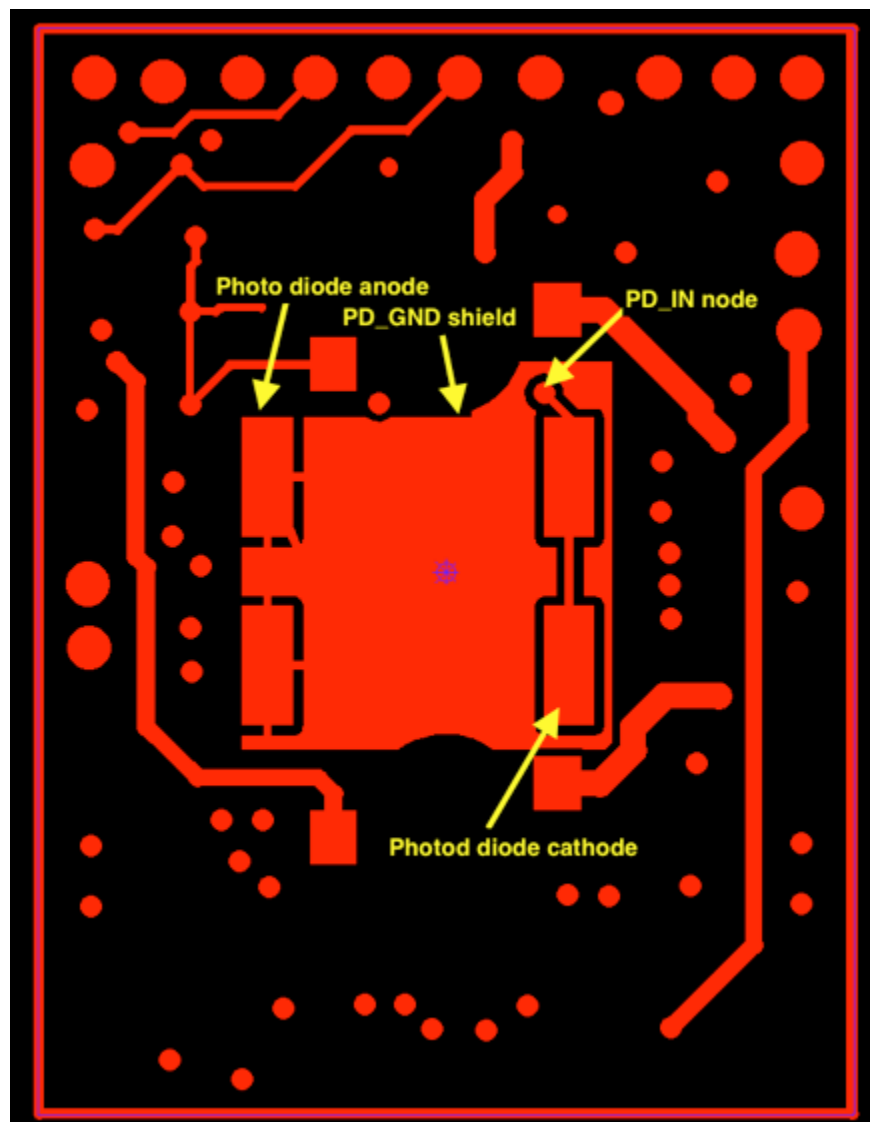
Example PCB Layout, Layer 6 (Bottom, Optical Layer)
